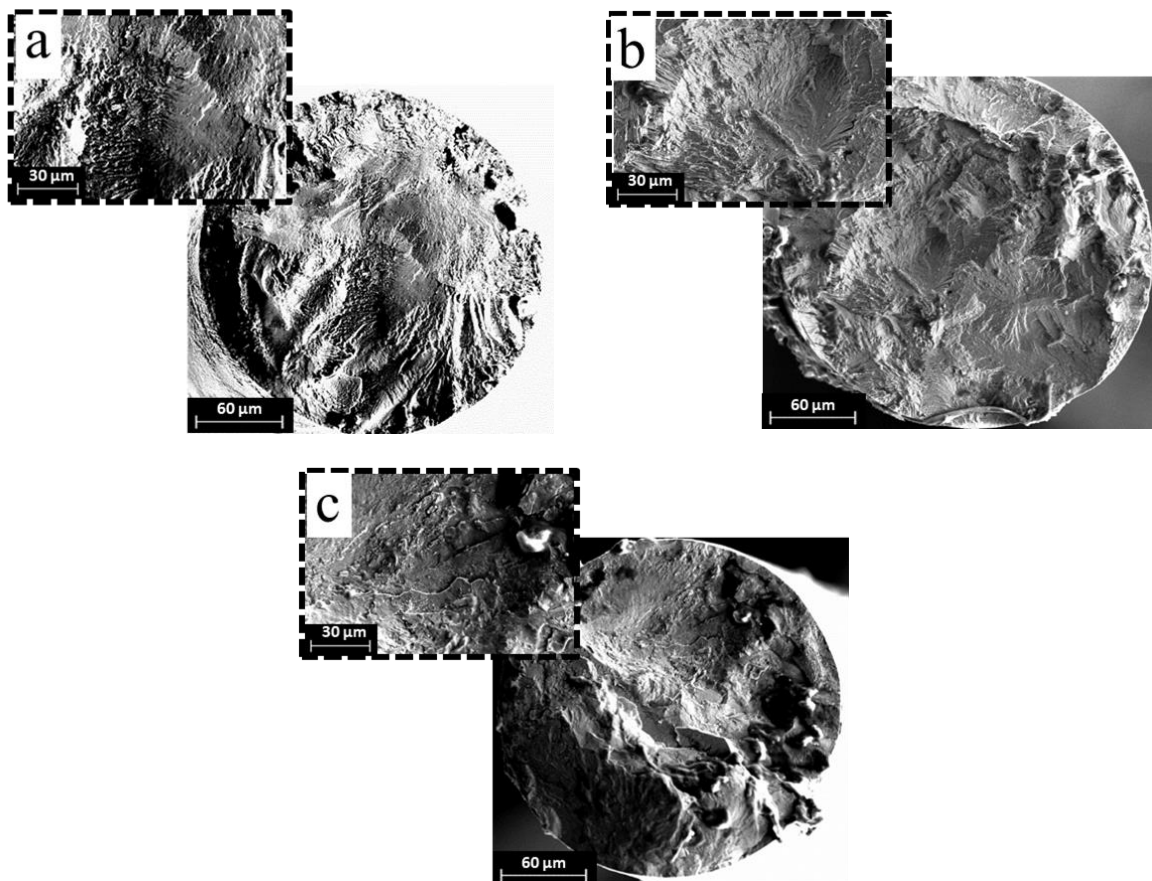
Surface Fracture of NiTi/SS Joints in a) centerline condition, b) Ni interlayer and c) laser offsetting welded samples.
